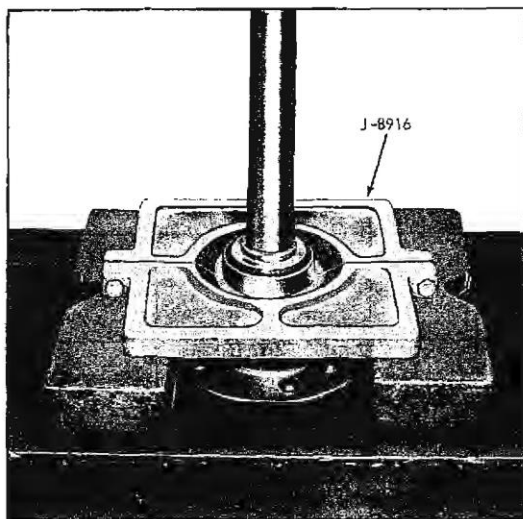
Removing Axle Shaft Bearing and Inner Retainer
